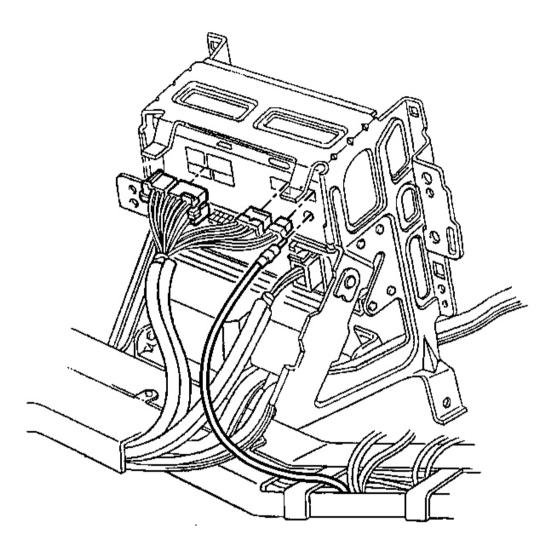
Electrical/Audio And Coaxial Cable Connectors At Radio Control Courtesy of GENERAL MOTORS CORP.
